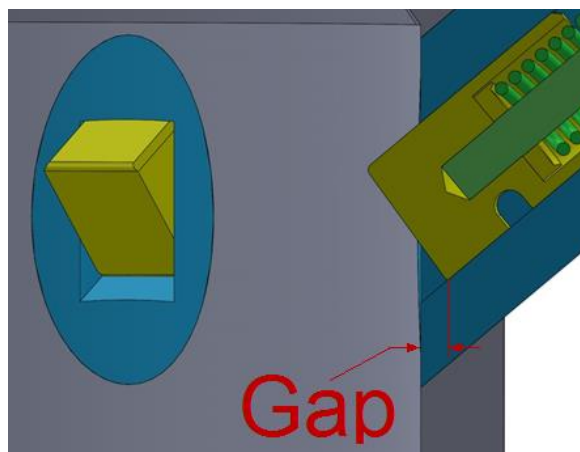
Lower alignment, between latch bar and BSDL-SI inner surface.
